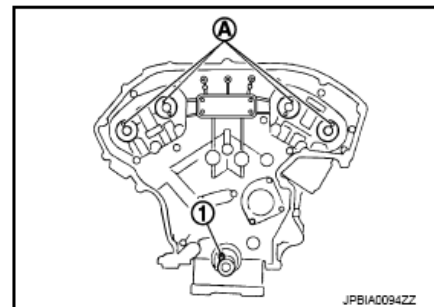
Identifying Crankshaft Key And Dowel Pins
